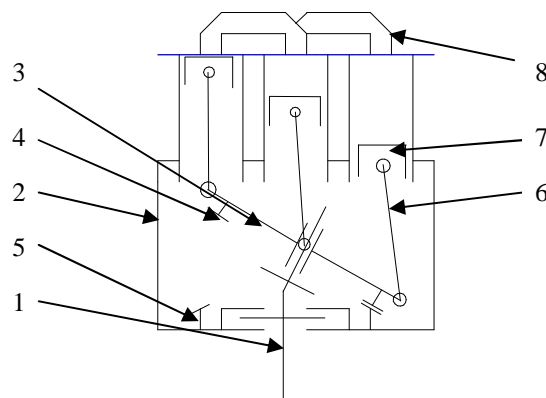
Mechanism FIK: 1- Crankshaft, 2- crankcase, 3- swinging plate, 4- bevel wheel (part of swinging plate), 5- bevel wheel (part of crankcase), 6- ball joint segment, 7- piston, 8- head cylinder and regenerator pipe.
